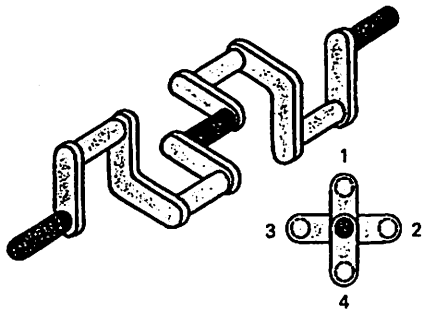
B. A V-8 engine may have the crankshaft throws arranged the same as a four cylinder engine, or method shown here which is widely used.
